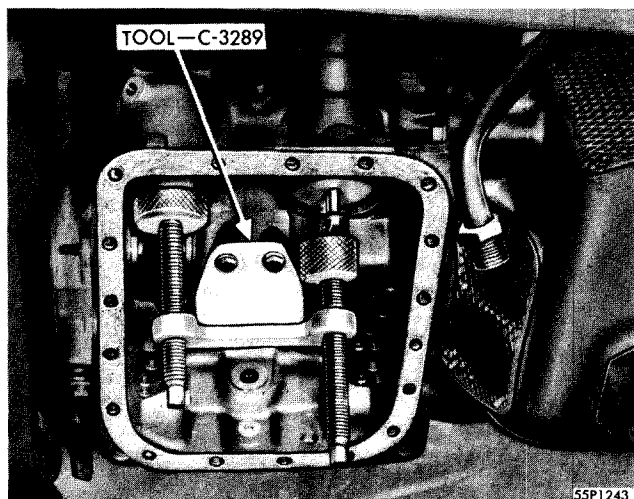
Install Tool C-3289 as Shown to Remove Reverse Servo
